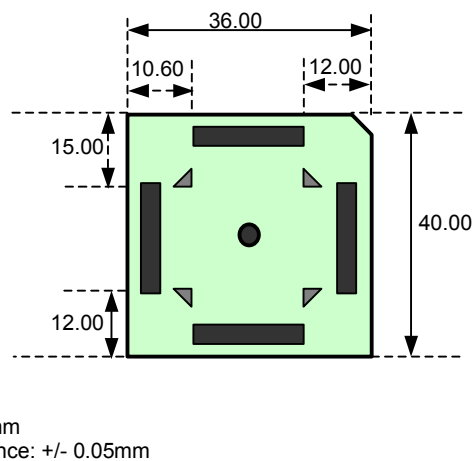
PCB footprint of YAMAICHI IC socket
